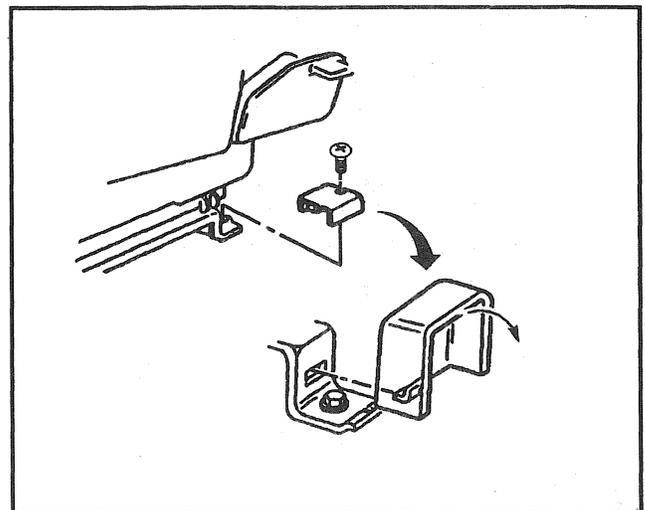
Front Bucket Seat Trim Cover and Components (Right Side Inner Only)
